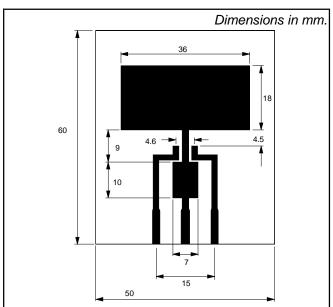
PCB for thermal resistance and power rating. PCB: FR4 epoxy glass (1.6 mm thick), copper laminate (35 μm thick).
